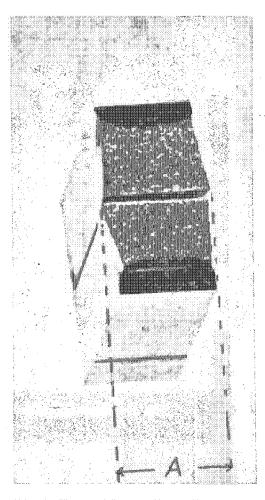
Halves of Broken Charpy V-Notch Impact Specimen Joined for the Measurement of Lateral Expansion, Dimension A.
